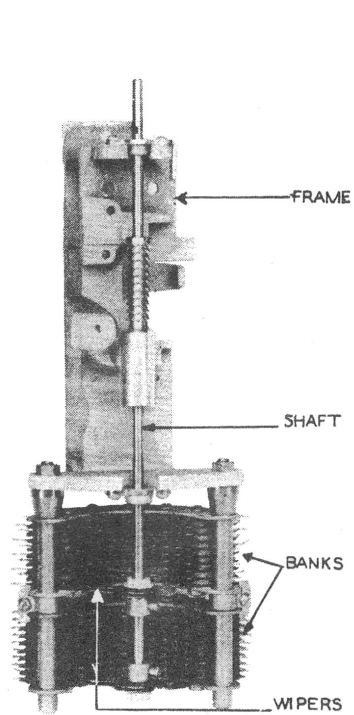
FRAME, SHAFT AND BANK ASSEMBLY
